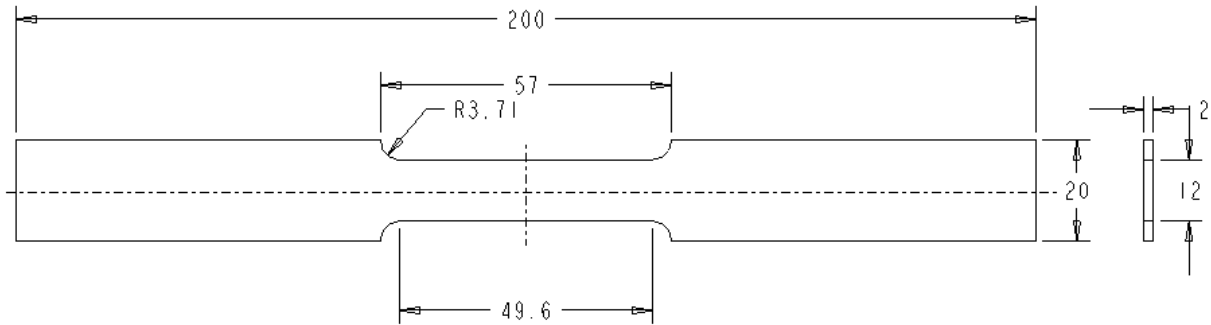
Geometry of Test Specimen as per ASTM E8 Standard
